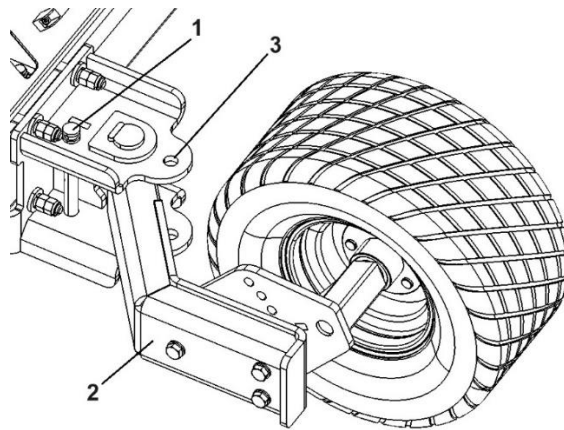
Moving the support wheels to the transport position: 1 – pin with locking pin (hole in the bracket for the working position), 2 – support wheel bracket, 3 – hole in the bracket for the transport position
